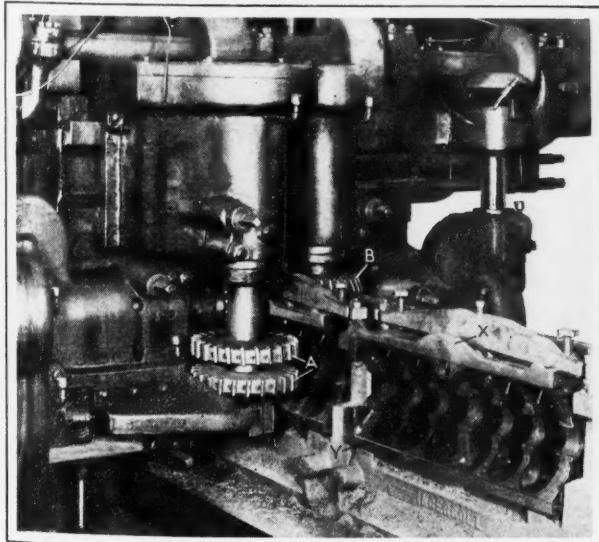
Rough- and Finish-milling the Top, Bottom, and Manifold Face of Cylinder Blocks
